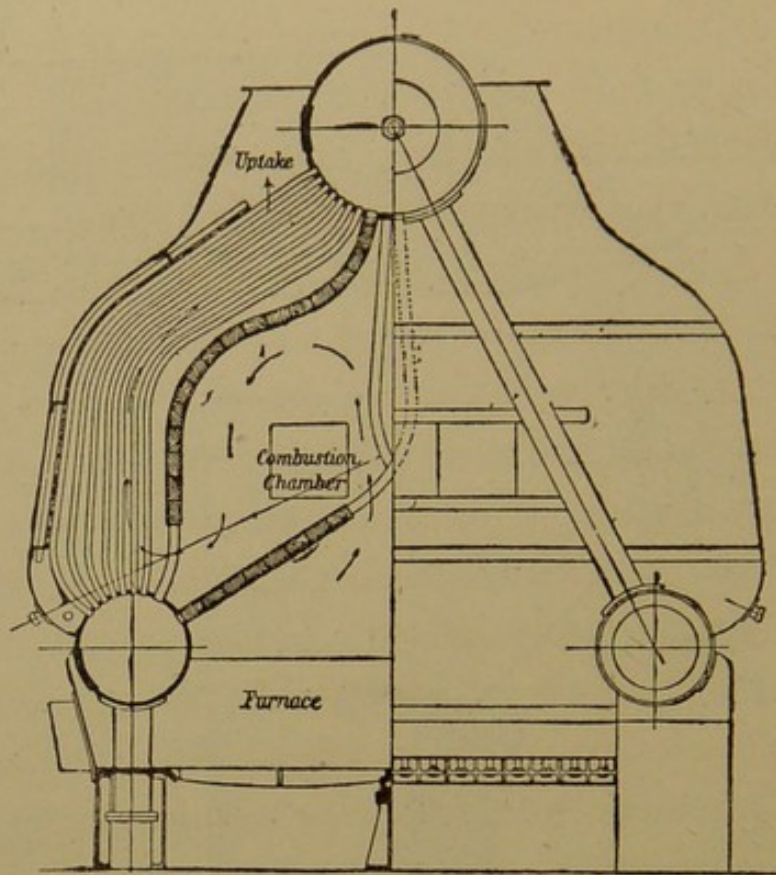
WEIR SMALL TUBE BOILER, WITH REFRACTORY LINED FURNACE.
